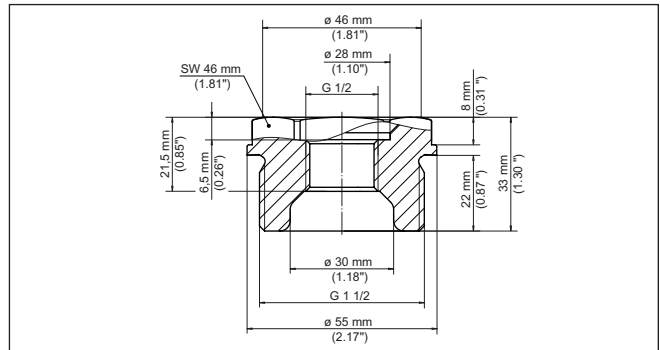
Dimensions of threaded adapter G1 $\frac{1}{2}$ (DIN 3852-A) on thread G $\frac{1}{2}$ (DIN 3852-A)
